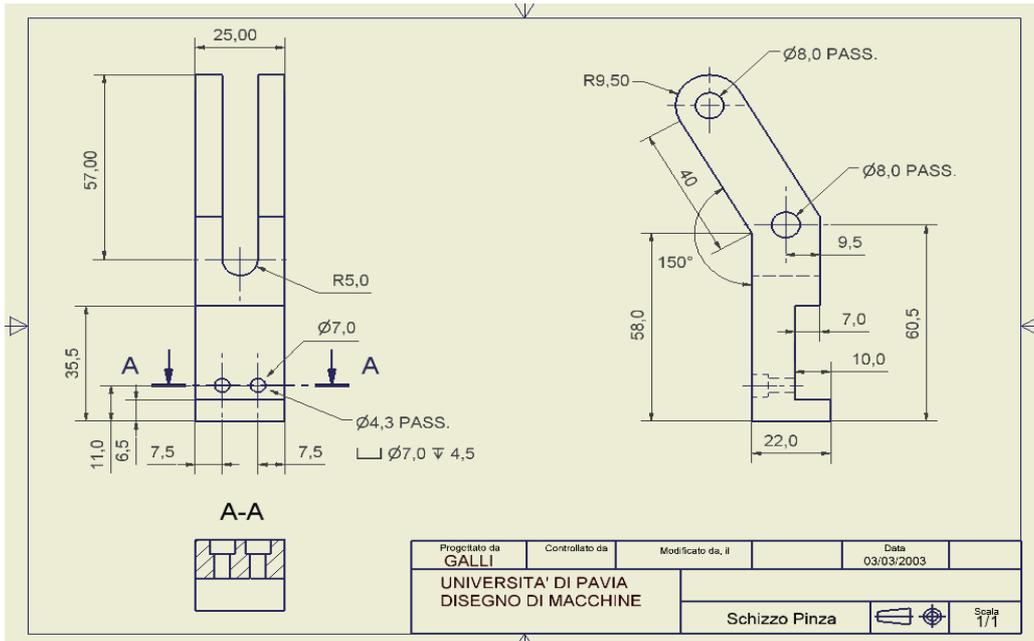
Drawing of a part of machine shown in fig.1 and used to verify reading ability.
